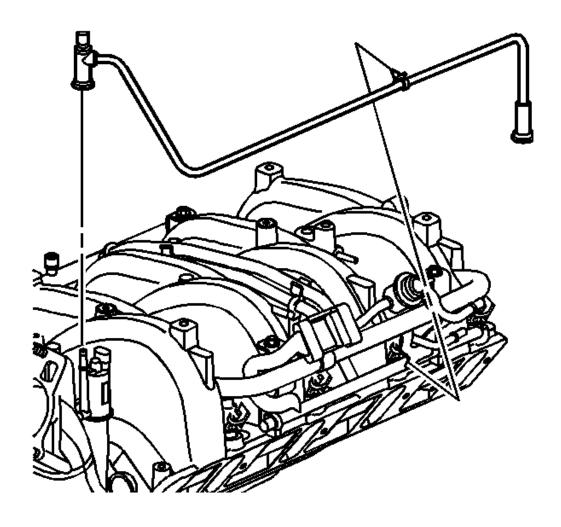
View Of EVAP Tube Courtesy of GENERAL MOTORS CORP.
